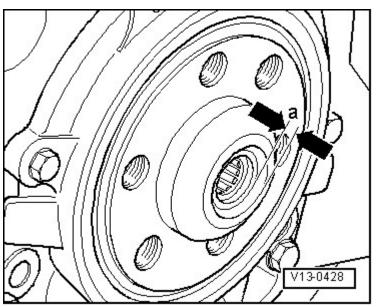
Identifying Installation Depth Dimension Courtesy of AUDI OF AMERICA, LLC
